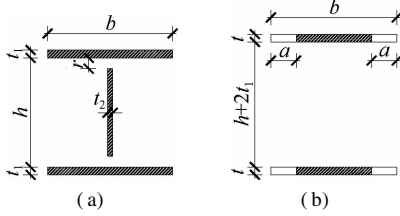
Cross-sectional schematic diagram. (a) Weld section; (b) 1-1 section
